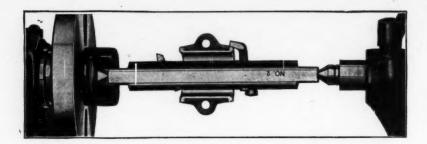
(Above) Trimming the end of the bearing with boring bar mounted between centers.
